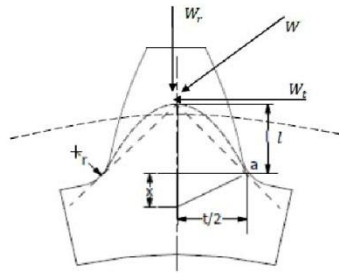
Loads and length dimensions used in determining tooth bending stress.
